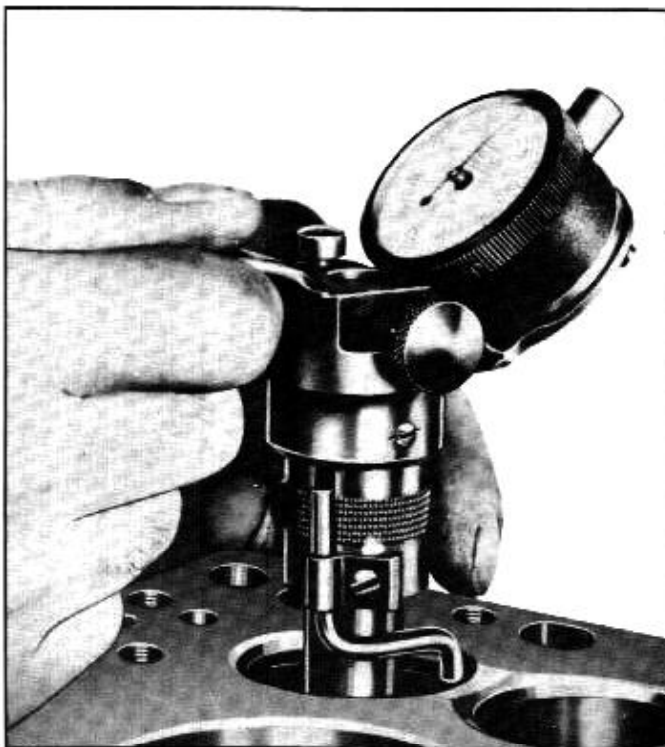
C-65—Checking Valve Seat Run-out—Typical
